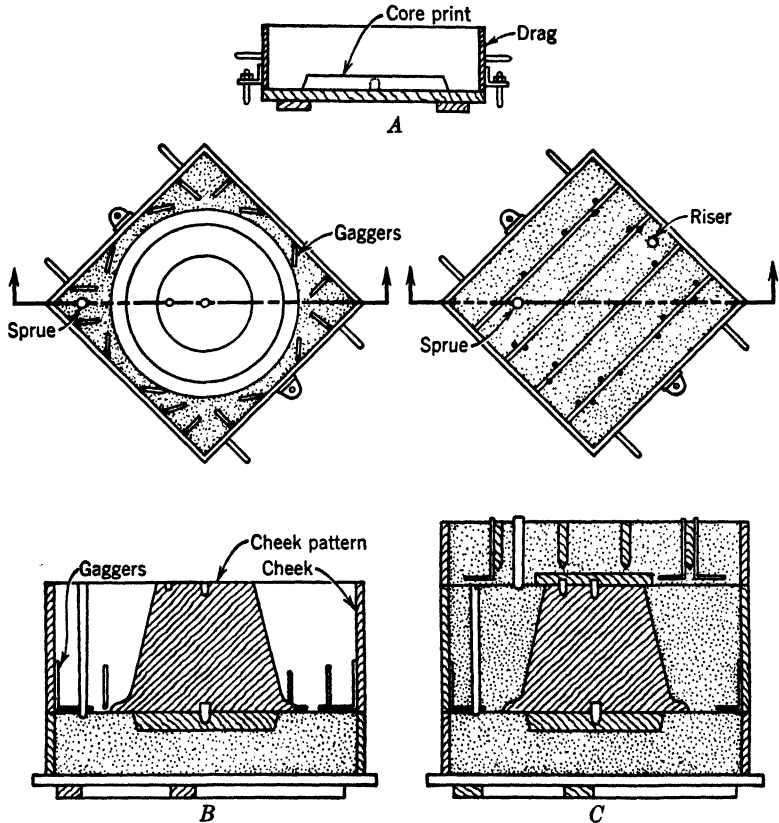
A. Pattern for core print is molded in the drag. B. Cheek pattern and flask in position to be molded. C. All parts of mold are rammed and ready to be separated.
